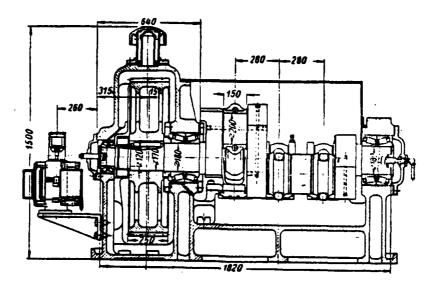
Section/cut on the crankshaft of horizontal three-plunger pump with the supply 500 l/min to the pressure 200 kg/cm².
